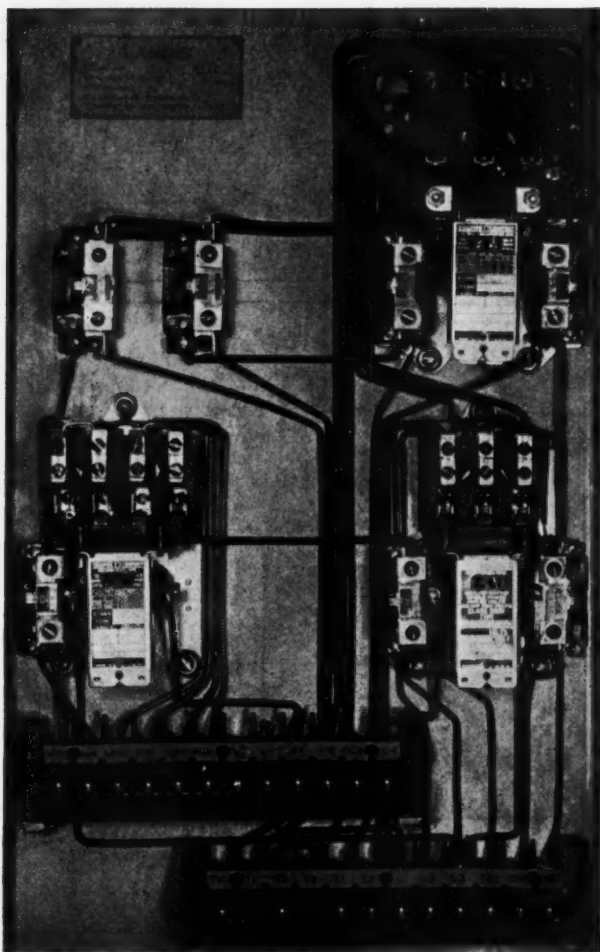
Assembled magnetic control panel wired to reduce length of wire. Wires are color coded
